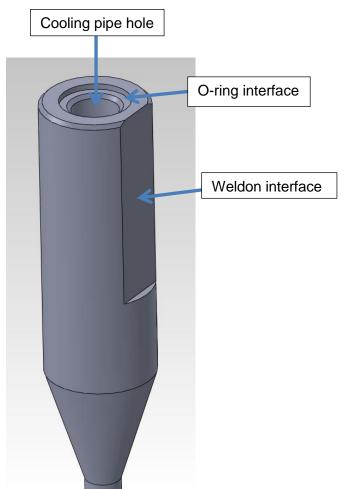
The picture shows the Weldon and O-ring interfaces on the Probe as well as the drilled hole for the cooling pipe.
